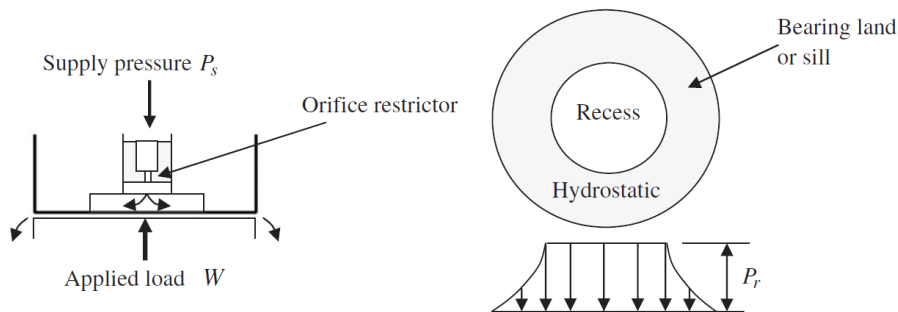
Cross section, bottom view and pressure distribution of a circular hydrostatic thrust bearing, modified from [5]
